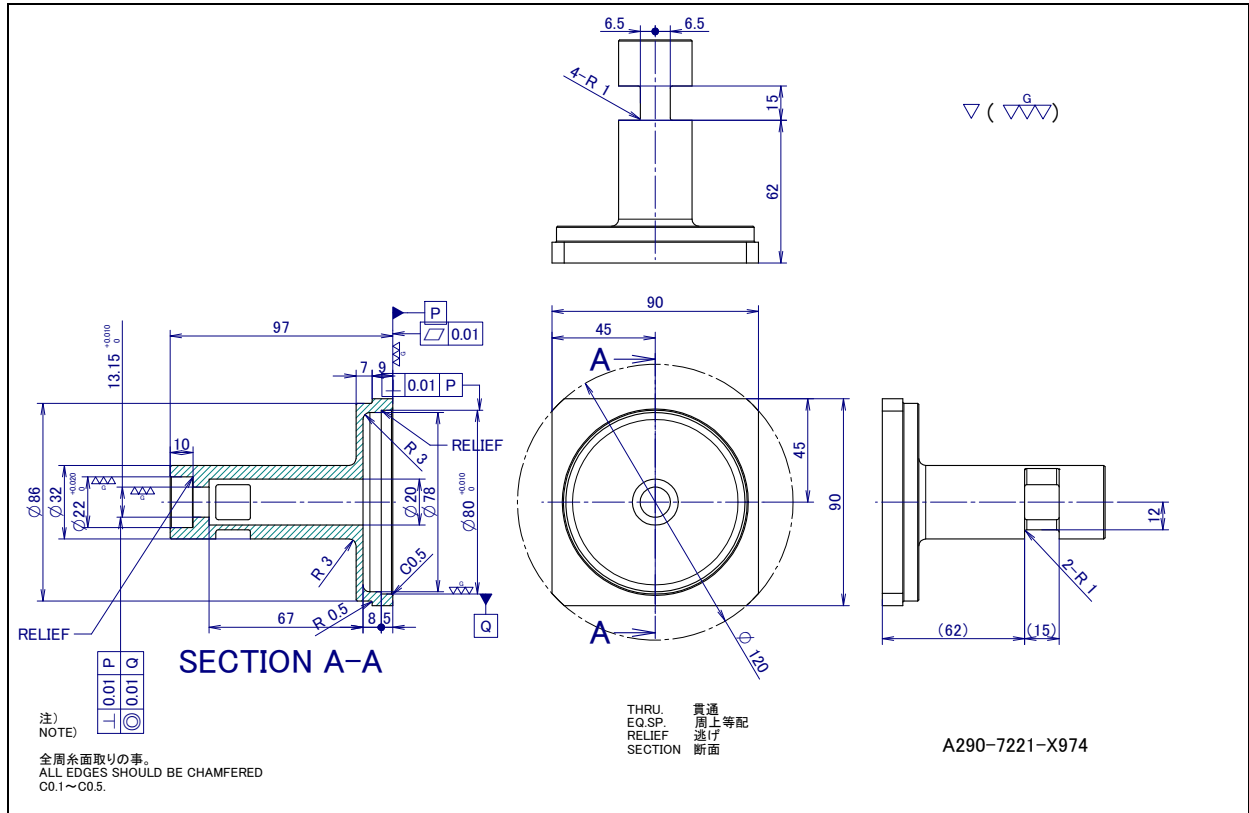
(i) Mounting fixture for gear of J3-axis motor
